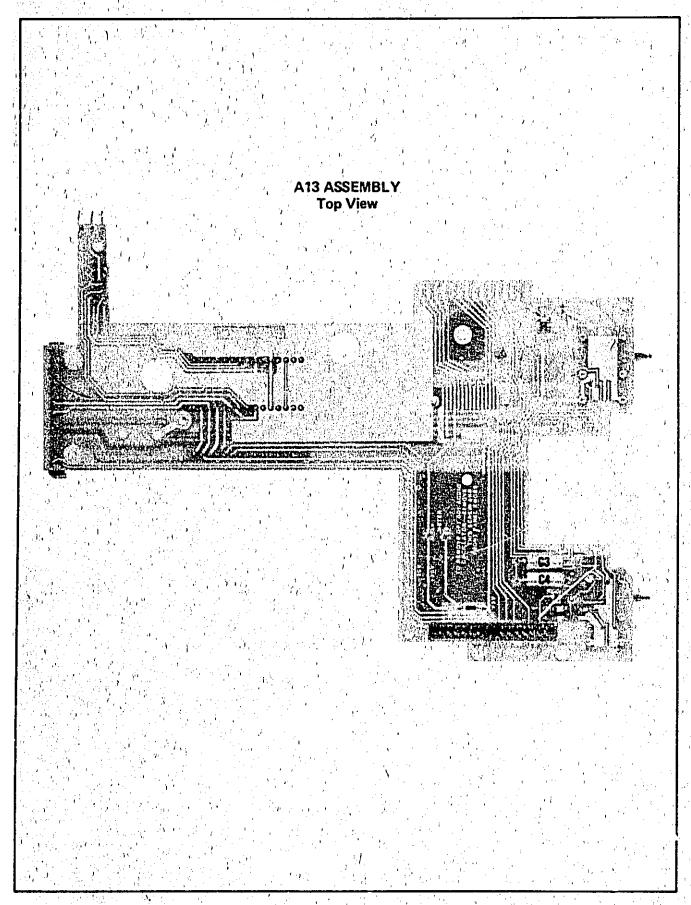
A13 Modulation/Metering Mother Board Assembly Component Locations (1 of 2)
